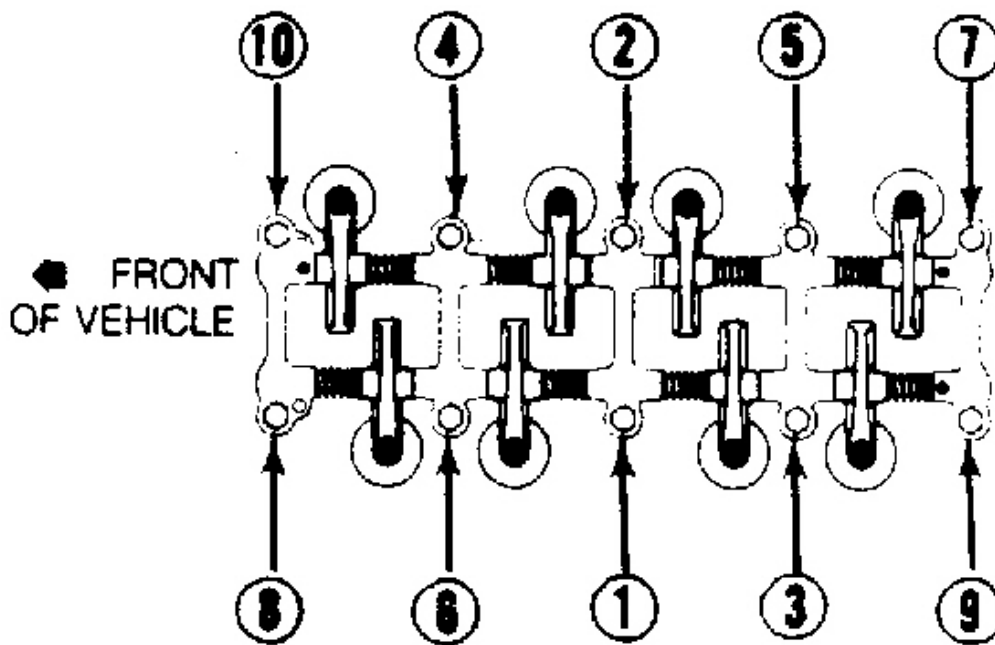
Cylinder Head/Rocker Arm Bolt Tightening Sequence
